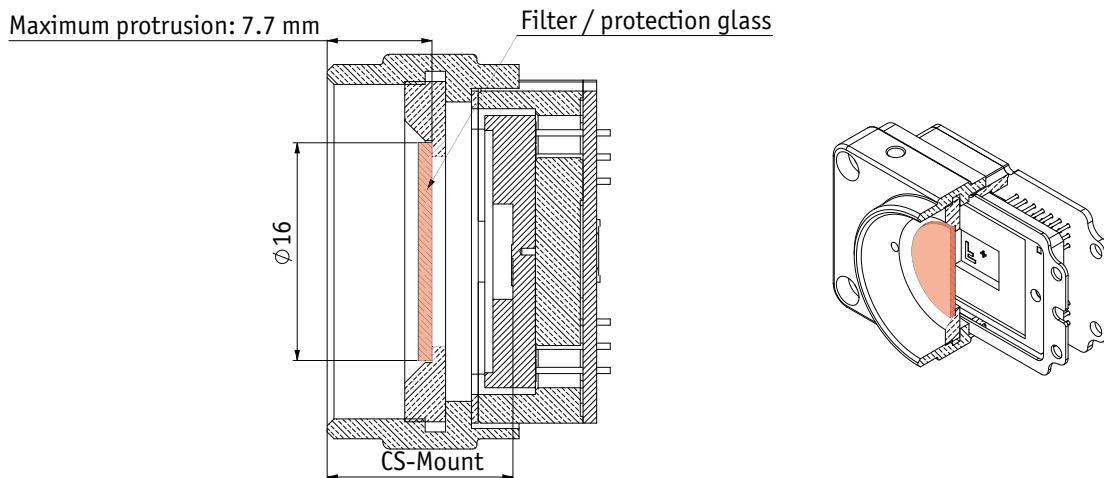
CS-Mount dimensions (16 mm filter) for Manta G- 235 / 282 / 283 / 505
